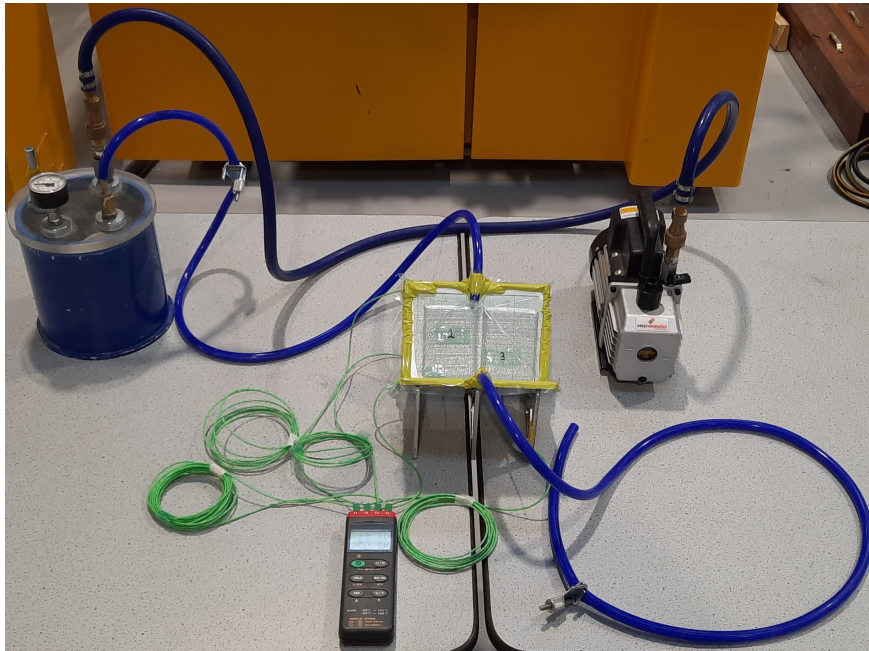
Two specimens side by side under vacuum, prior to the resin infusion process. The infusion takes place through the inlet tube (right) connected to the tool and the outlet tube connected to the catch-pot (left). The vacuum pump connected to the catch-pot provides the necessary pressure difference to the atmospheric pressure, which is necessary for the infusion to commence.
